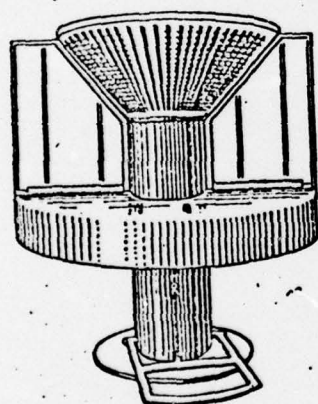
Rotatable bench for welding and assembling, with built-in suction unit
